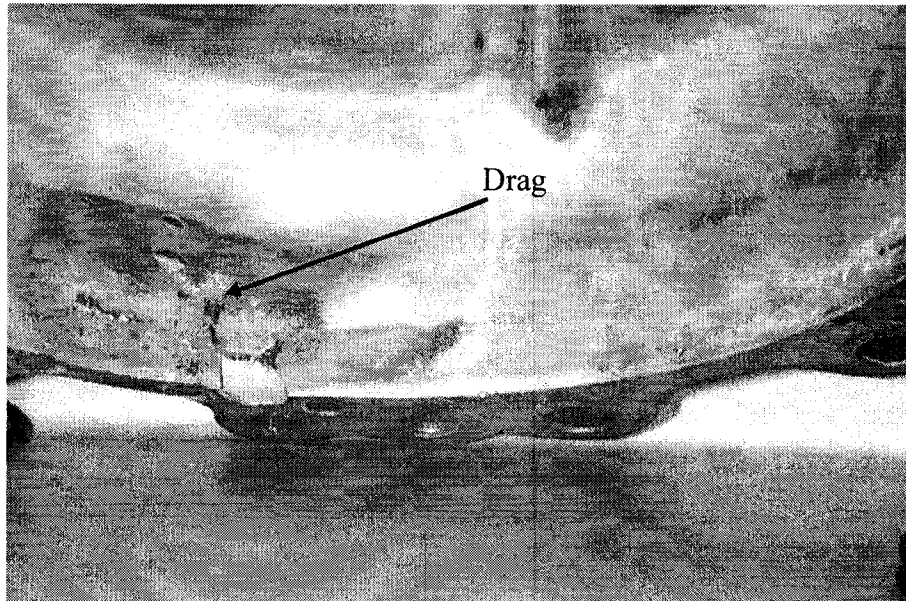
Casting defects, solder drag/tear, present in a die cast transfer case [31].
